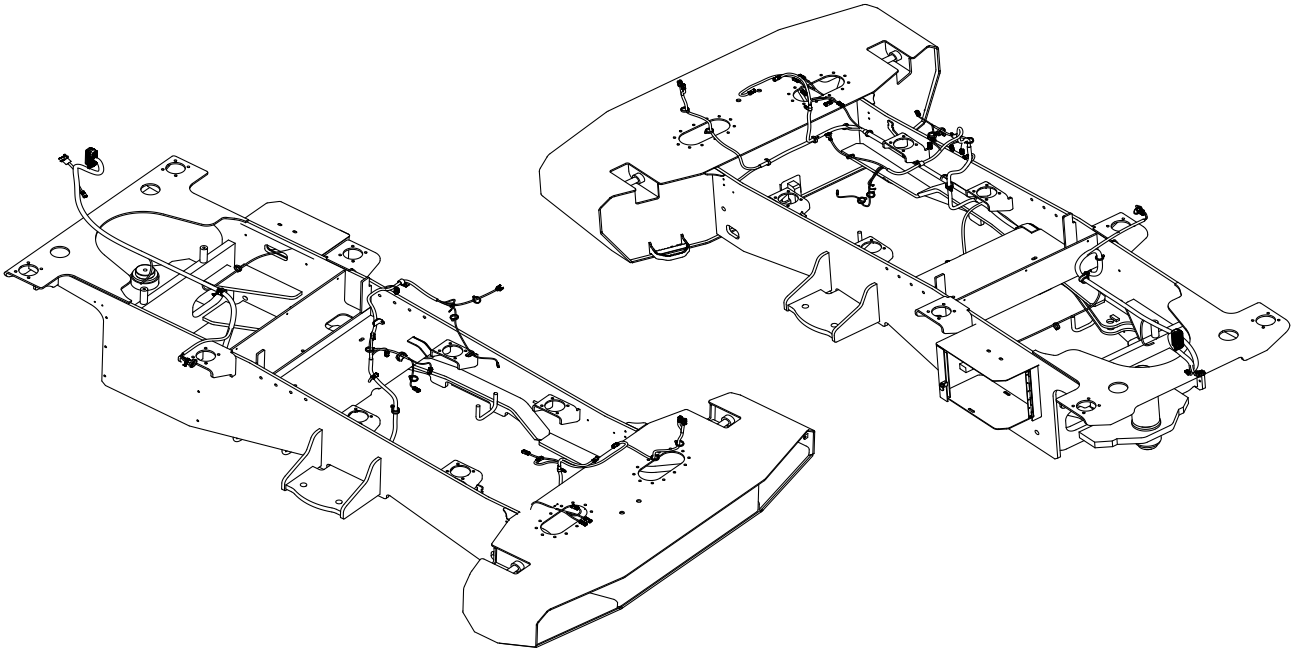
336/C2883 (Sheet 3 of 3) - Chassis Harness
